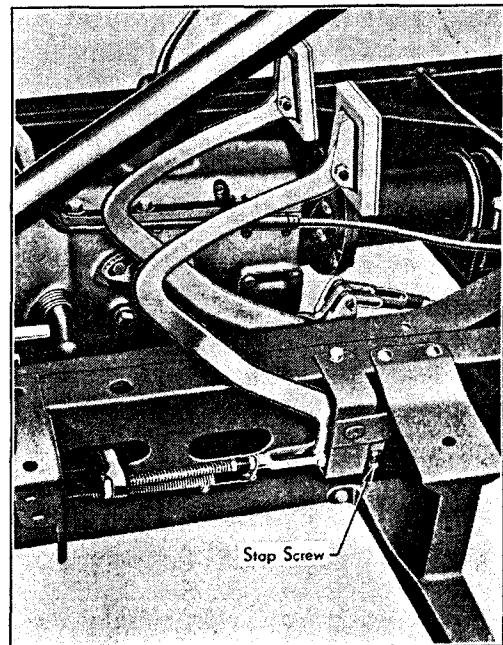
Pedal arrangement on 355-D Series 30, 370-D and 452-D cars, showing the clutch pedal stop screw.
